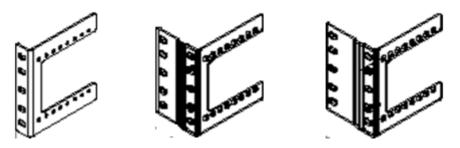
Adjustable Rack Mounting Brackets (19 inches, 23 inches, and 24 inches.)
